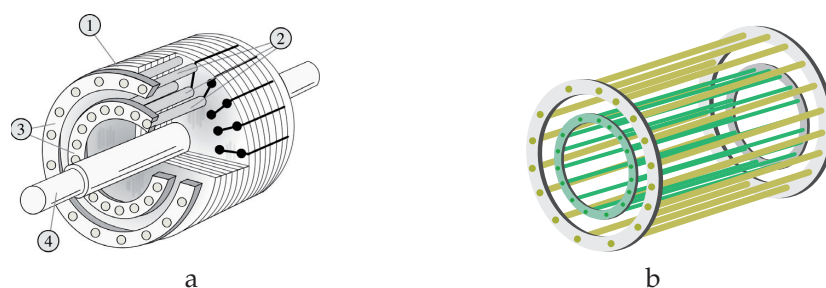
a – Double squirrel-cage rotor: 1 – rotor core, 2 – bars, 3 – end rings, 4 – shaft; b - winding of double squirrel-cage rotor
